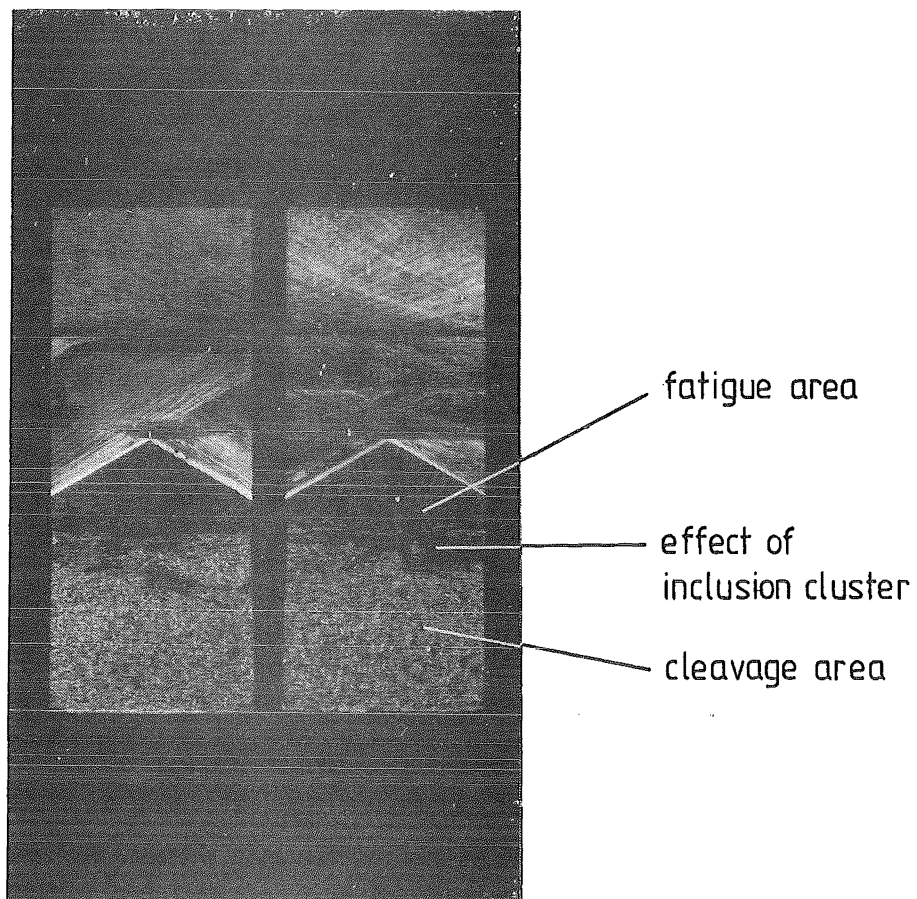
FRACTURE SURFACE OF A 20mm AS-ROLLED BILLET
